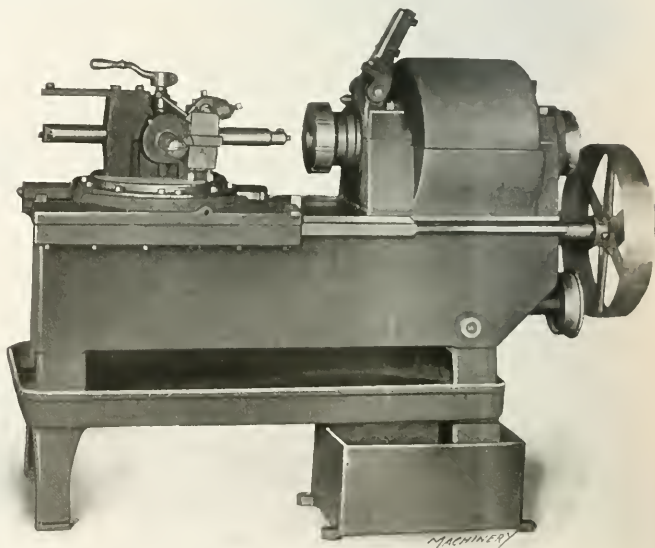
Opposite Side of Blood Turret Lathe shown in Fig. 1
